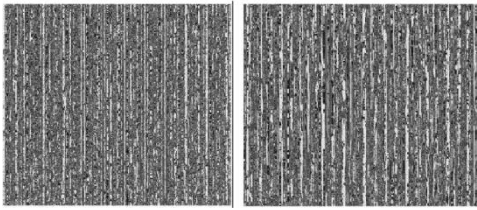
acier toutnl 13240.3 surface morphology (sharp and worn-out tool)
